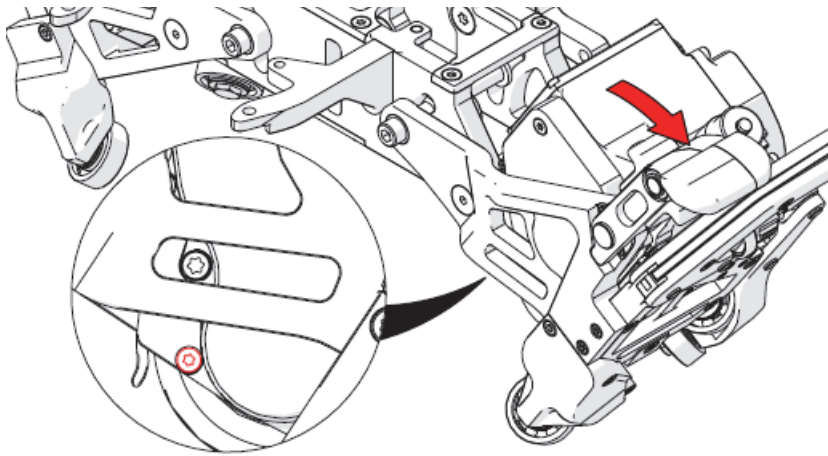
Removing Torx screw from bottom of drive wheel guard
